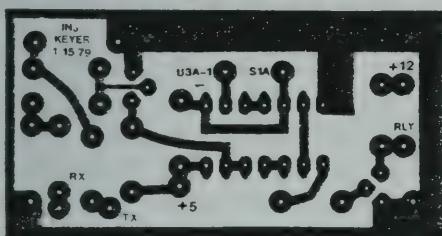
The circuit board layout for the injection cable keyer as seen from the foil side. Shown actual size.
